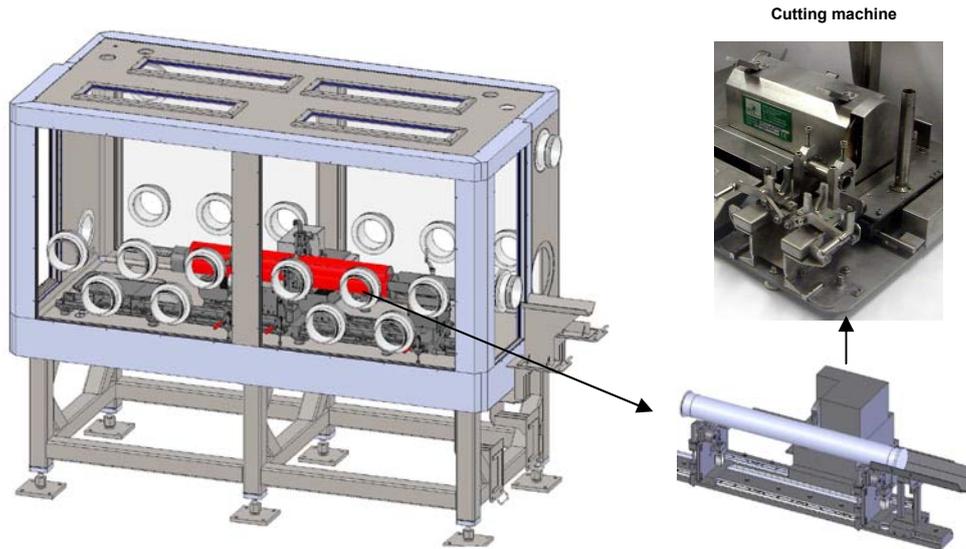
Glove box for solid material containers; abrasive orbital cutting tool, cutting machine (inset photos)
